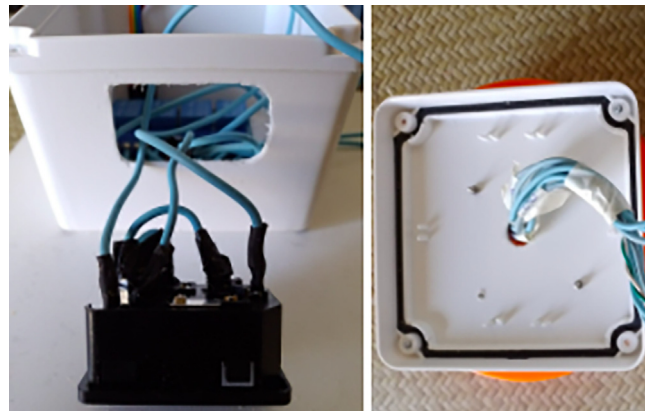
Container box holes to embed the Fuse Switch and pass the cables to the Multi plug Electrical Adapter Power Strip.
